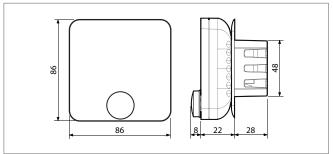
Dimensional drawing for the zone operator terminal for flush mounting (dimensions in mm)
